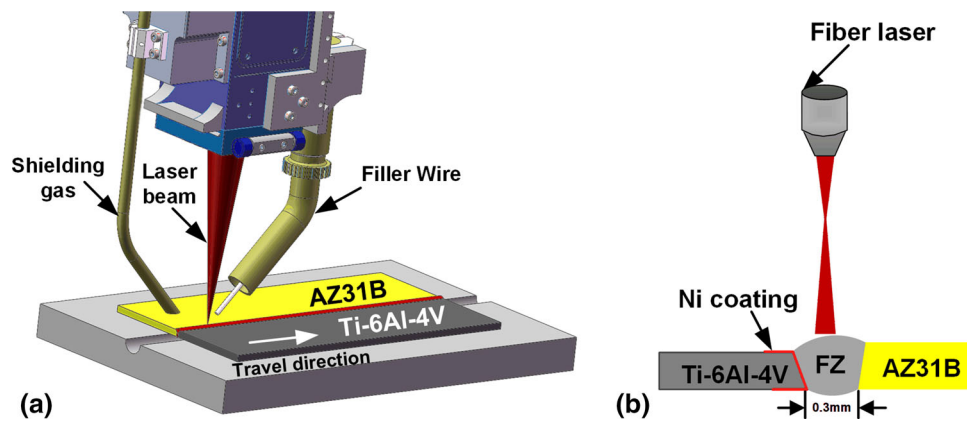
Schematic illustration of laser welding–brazing Mg-/Ni-coated Ti in butt configuration: (a) The configuration before welding; (b) welding process
